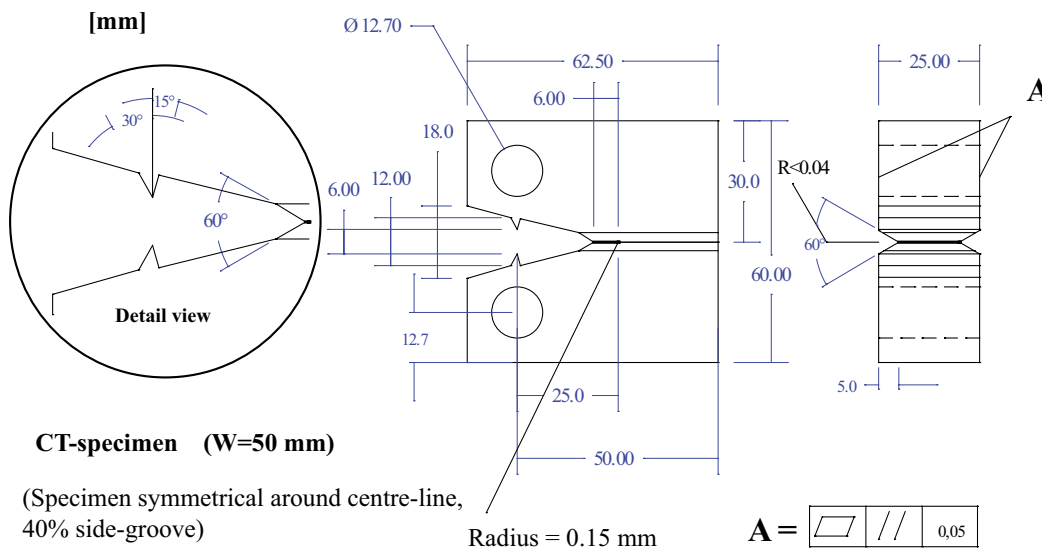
Geometry of compact tension (CT) specimen having $W = 50$ mm.
